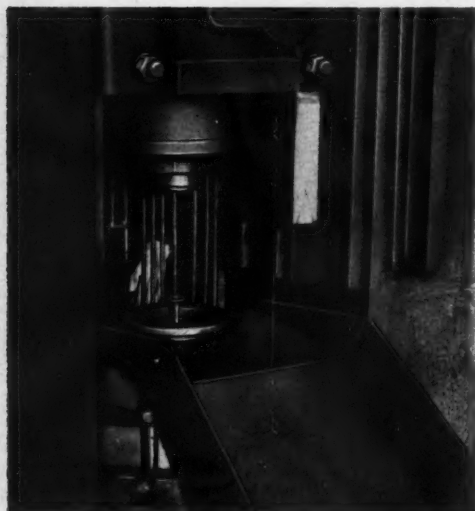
A view showing details of the automatic loading equipment fitted to the British Federal electric upsetting machines. An electrical circuit must be completed through the blank to initiate the automatic cycle of the machine
